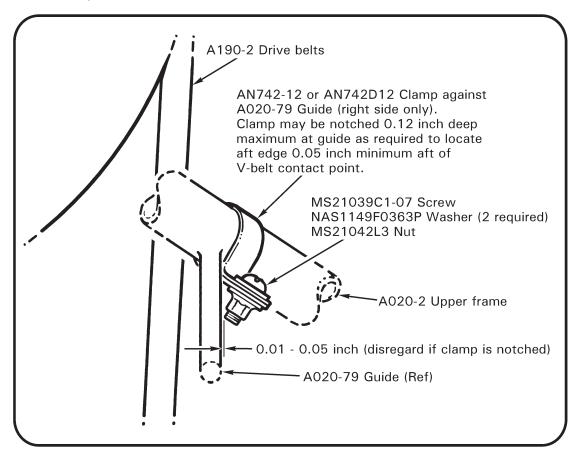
C UPPER FRAME PROTECTIVE CLAMP INSTALLATION (View looking forward)
